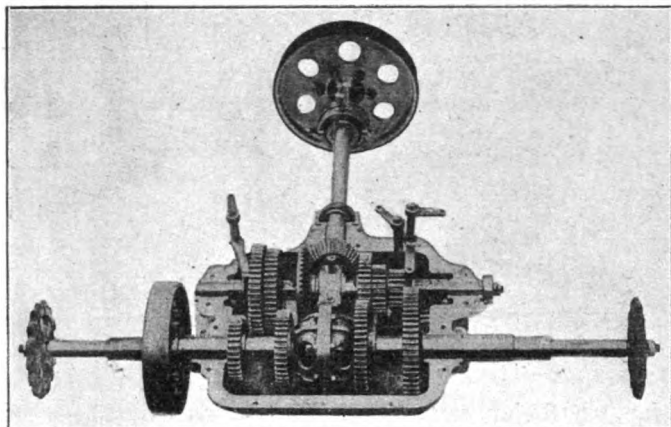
The Vinot-Deguingand Change-Speed Gear.
